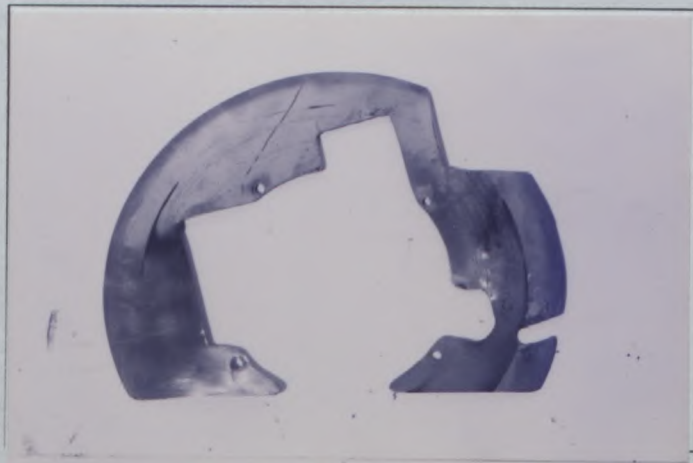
PROTECTION SHIELD FOR DISC
